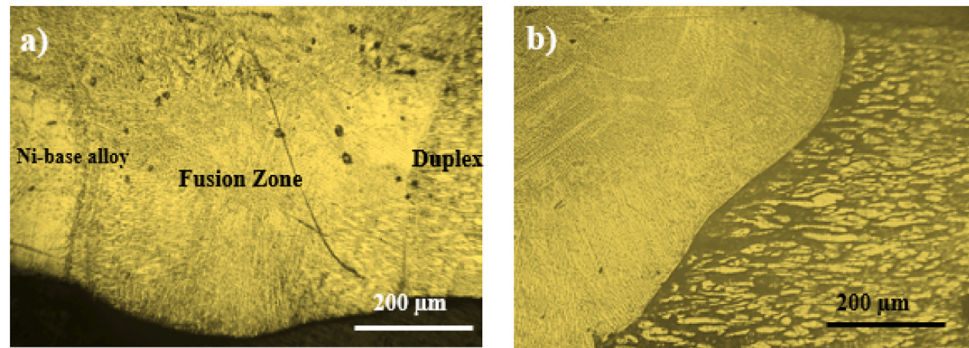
The melt pool cross section appearance for depth measurement, a) dissimilar weld fusion zone and base metals, b) fusion zone adjacent to the duplex base metal.
